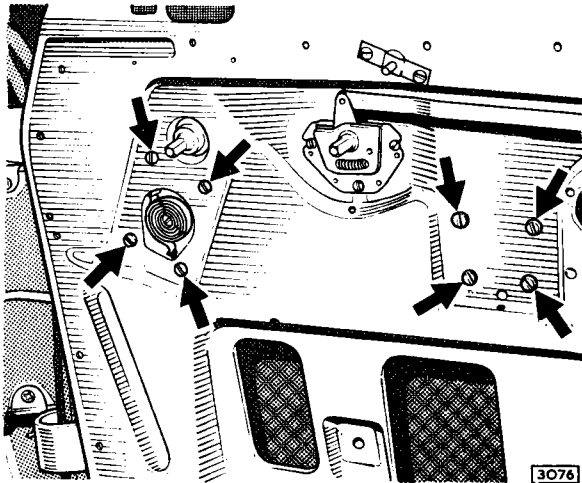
Showing the screws securing the window winding mechanism to the door frame
